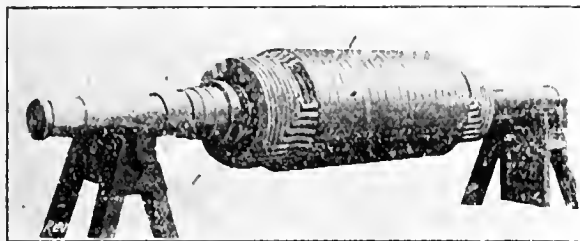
8,000-K.V.A., 2,400-R.P.M. ROTOR, IN COURSE OF WINDING.
